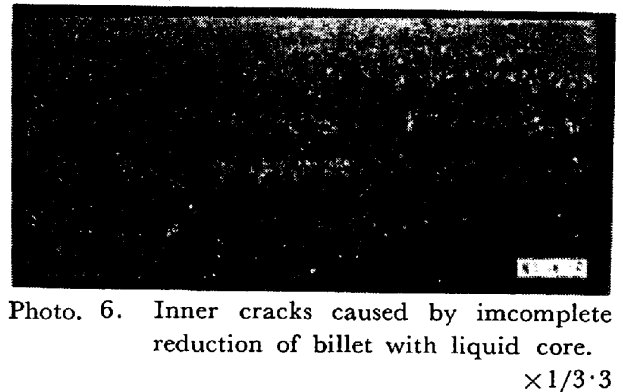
Inner cracks caused by incomplete reduction of billet with liquid core. x1/3.3
